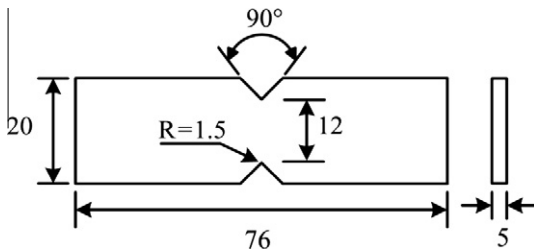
Iosipescu shear test specimen (dimensions in mm).
